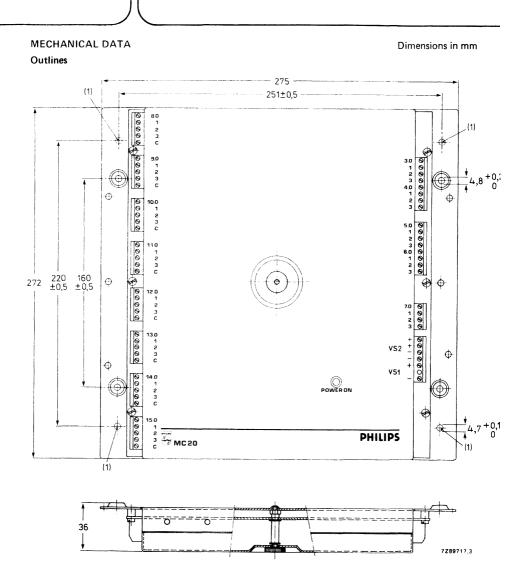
The holes marked(1) are for mounting clips MB20, see 'Accessories'.
